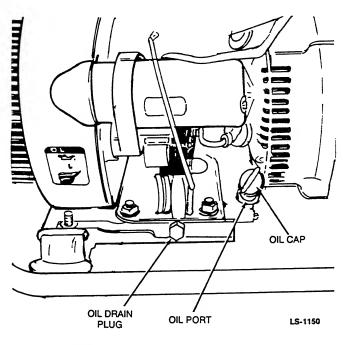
ENGINE OIL CAP, OIL PORT AND OIL DRAIN PLUG
